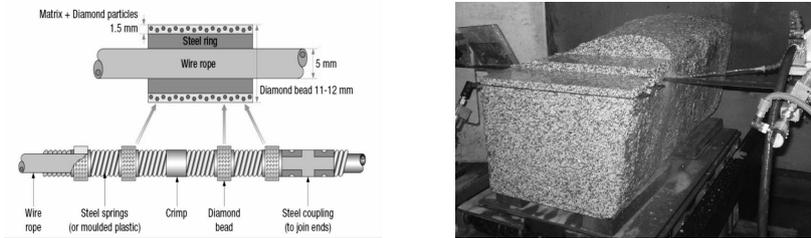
Schematic view of diamond cutting wire; Fig. 9. Brown granite cutting in progress.
